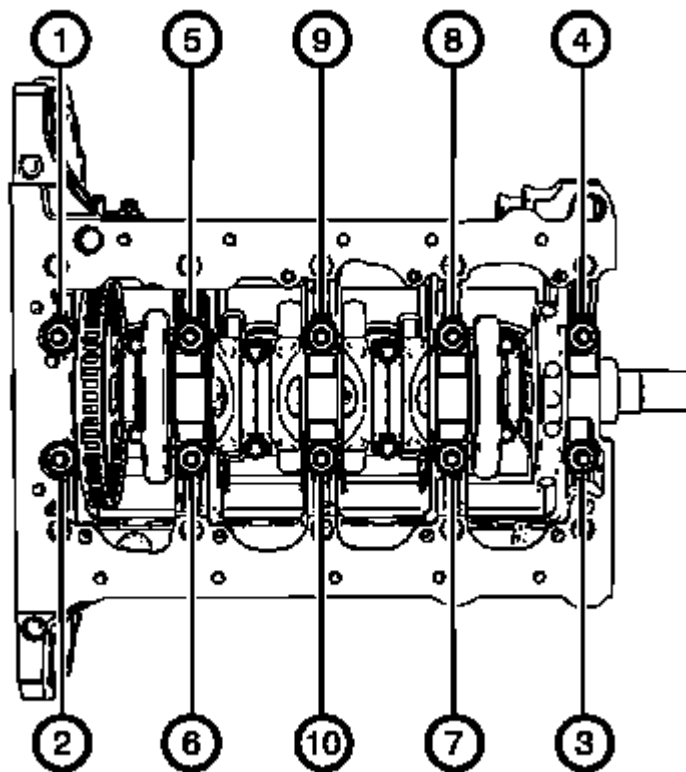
Inner Crankshaft Bearing Cap Tie Plate Bolts Loosening Sequence
